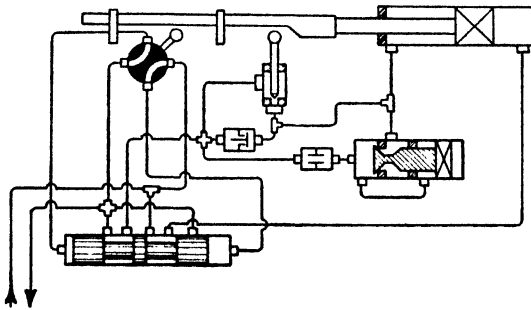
MACHINE TOOL SYSTEM WITH SLIDE OPERATED FLOW CONTROL VALVE TO VARY SPEED
